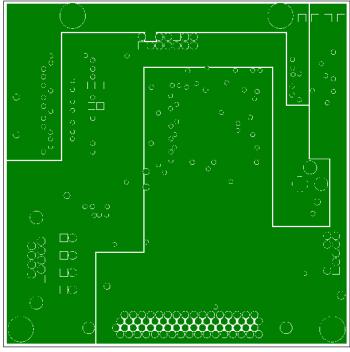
Debug Board: Middle Layer 2, Supply Plane
